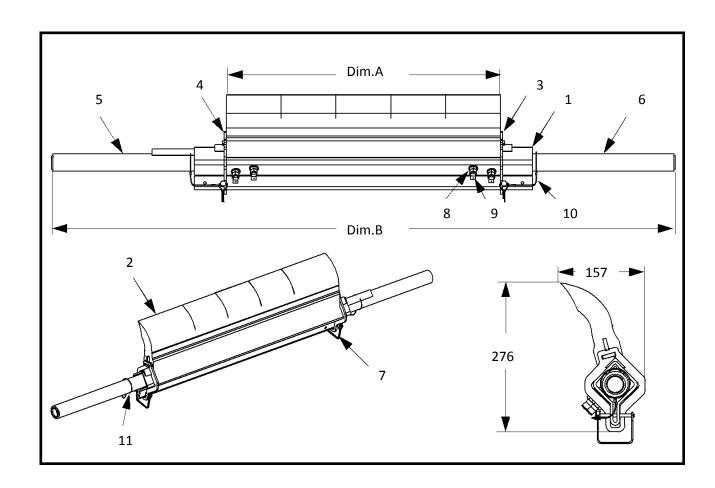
Martin  $^{\circledR}$  QB1  $^{\intercal M}$  Cleaner HD Assembly, P/N QB1-XXXX1XXXXXXXXX
